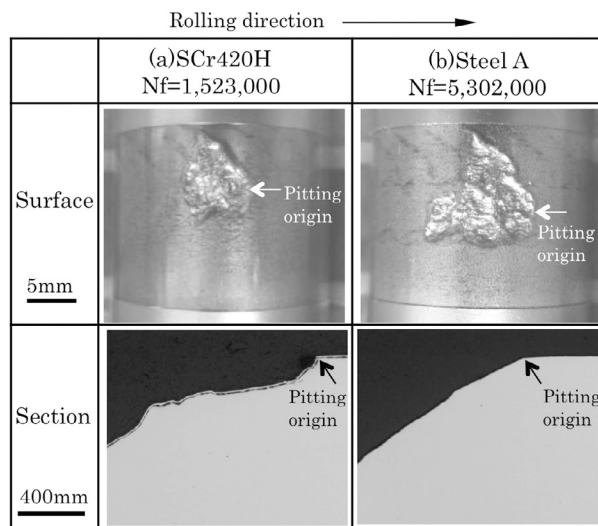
Surface photographs and optical micrographs of specimens after testing.
